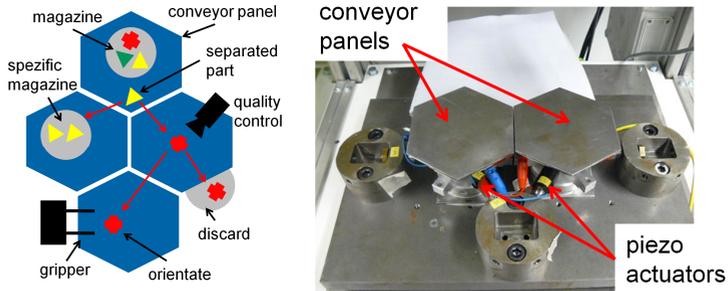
Feeder system composed of several coupled miniature oscillating conveyors
